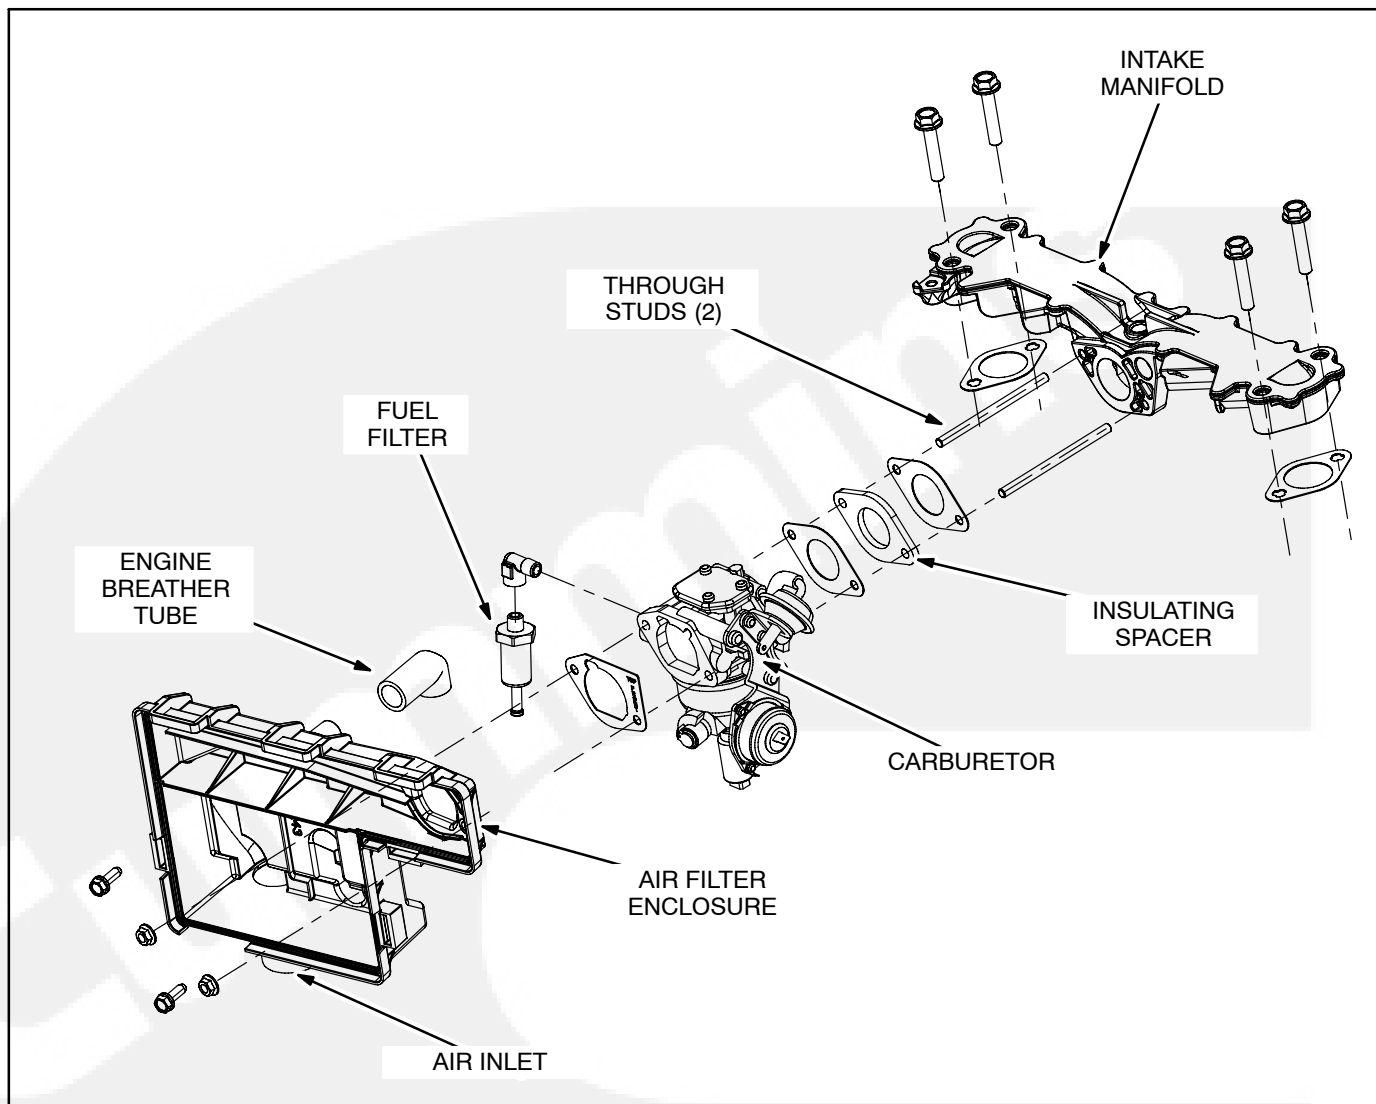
GASOLINE CARBURETOR AND INTAKE MANIFOLD ASSEMBLY
